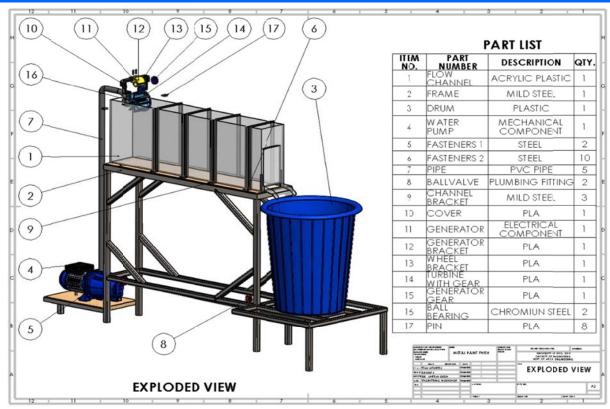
The bill of materials of the designed water wheel assembly with open channel water flow apparatus
